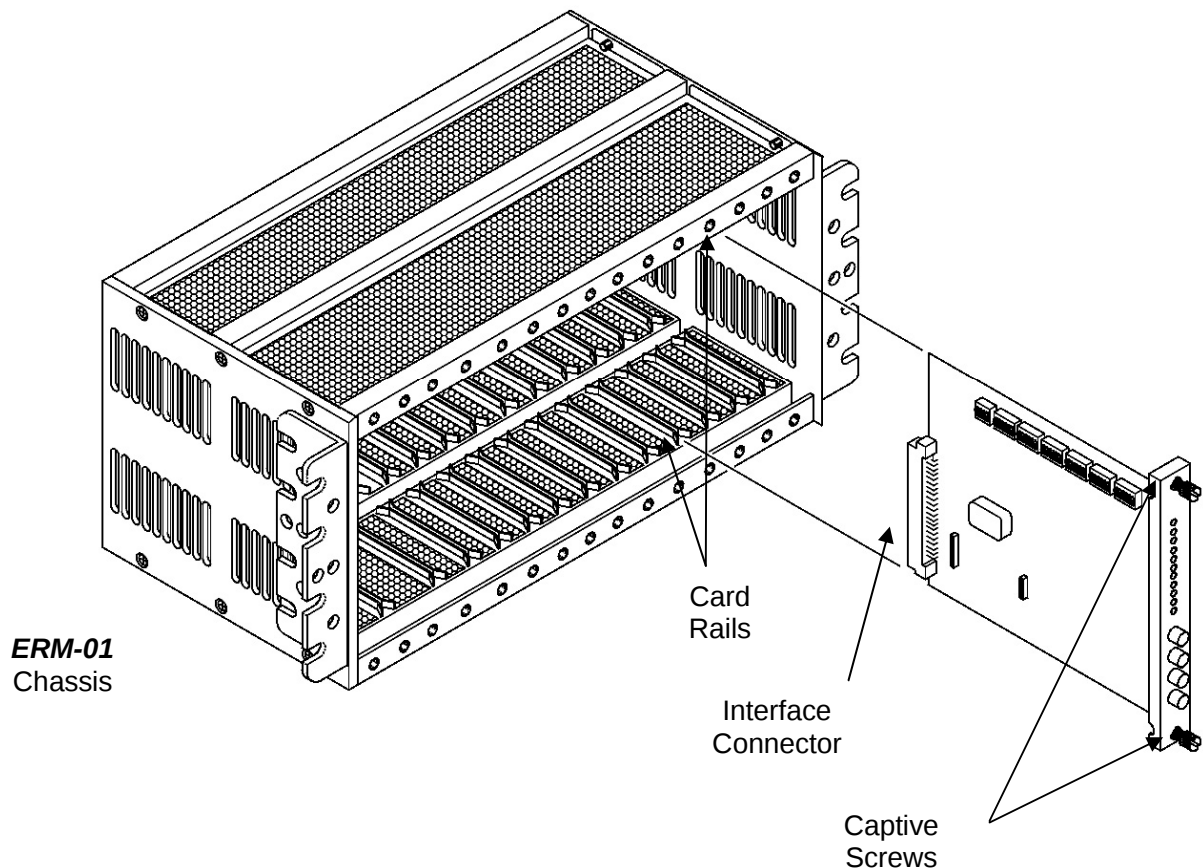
Installation/Removal of E1U-ET100 Line Card in ERM01 Chassis
